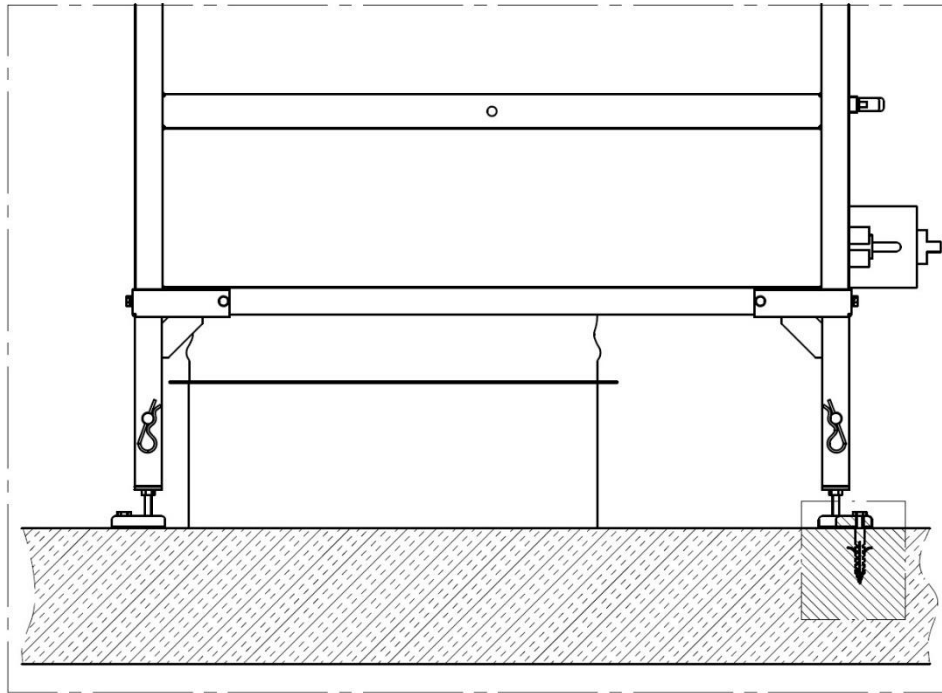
Vertical installation (also horizontal) on steel feet screwed to the ground with dowels.
